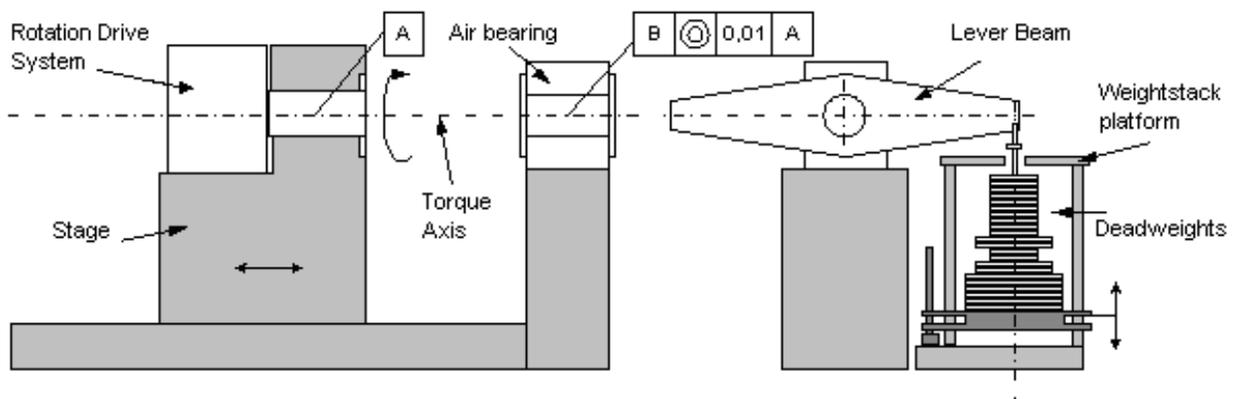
Principal components of the LNE 50 Nm deadweight torque standard machine
